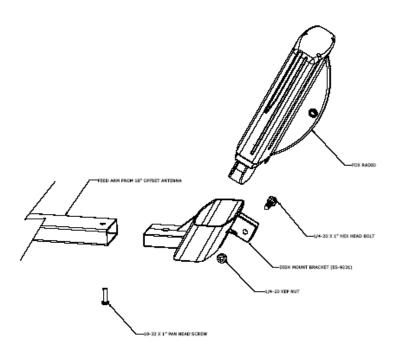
Figure X-X: Mounting M5580M-FSU with Mounting Cradle for AD5800-25 Reflector Dish
